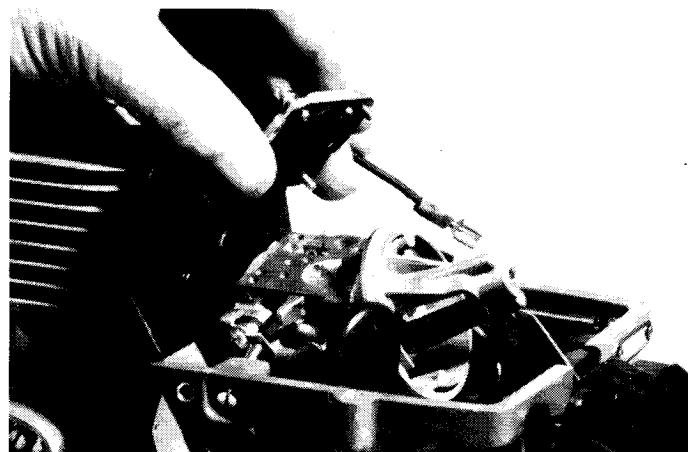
Use leakage detector no. 9029 to ensure that the carburetor is not leaking and that the needle valve closes properly. The carburetor should stand up to a pressure of at least 11 p.s.i. (0.8 kp/cm²).
